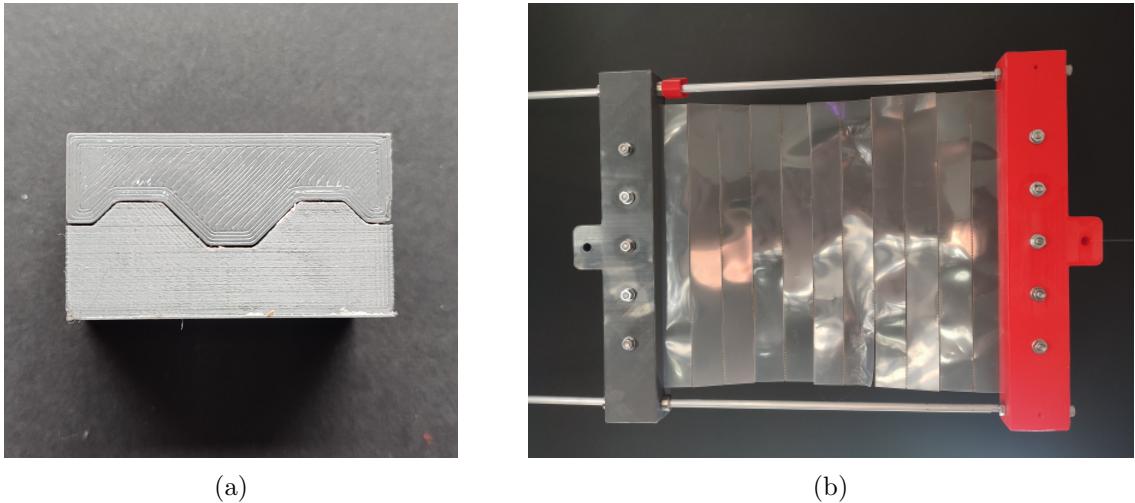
a) Side view of clamp geometry b) Clamp setup.
